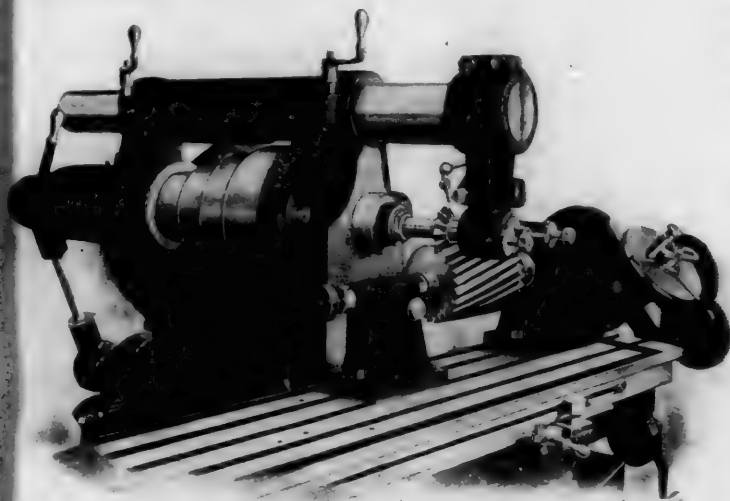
MILLING A HEAVY SPIRAL CUTTER.
